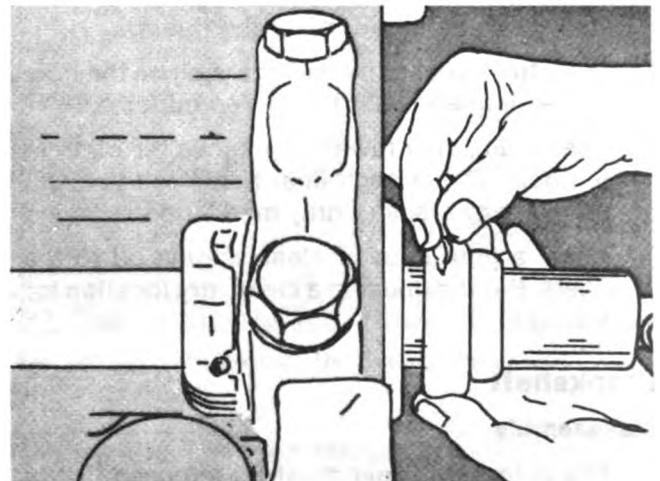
Adjust The Cutting Depth Of The Tool.
